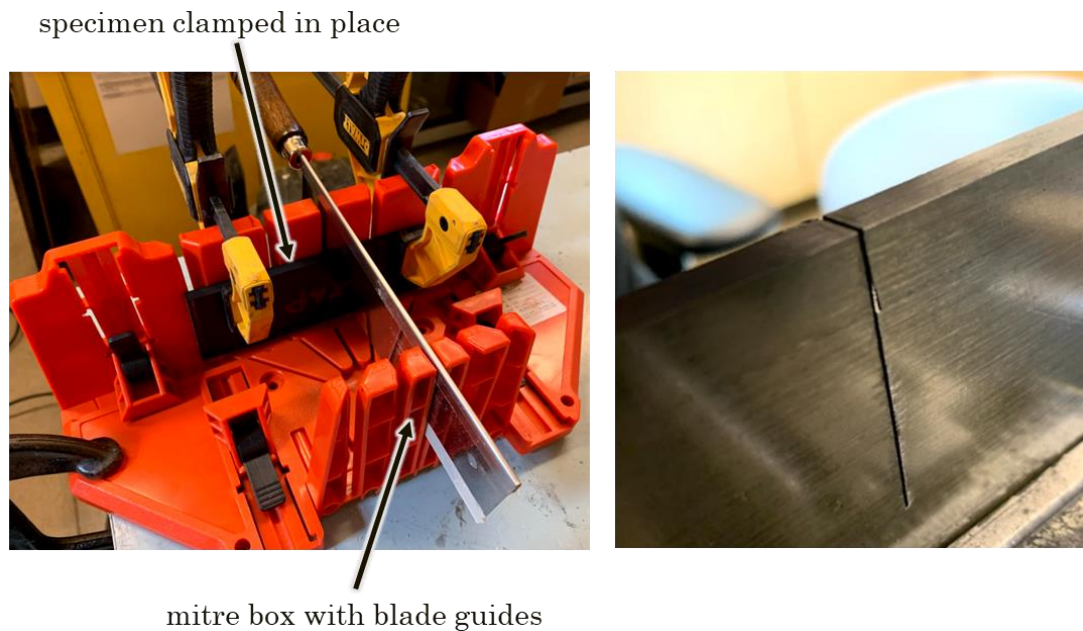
(left) Test specimen clamped into a mitre box that is used to install straight cracks (right) resulting straight crack
